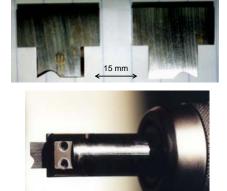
Non-rotational cutting tool for asymmetrical groove shape.
